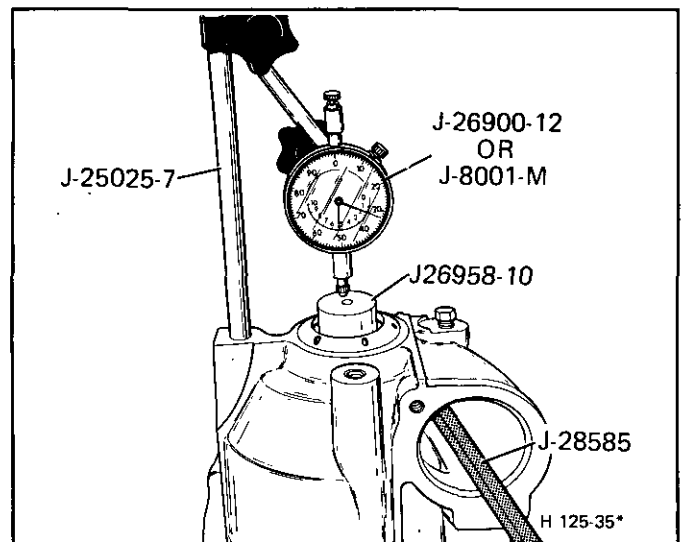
Final Drive End Play Selective Thrust Washer Measurement (680)
